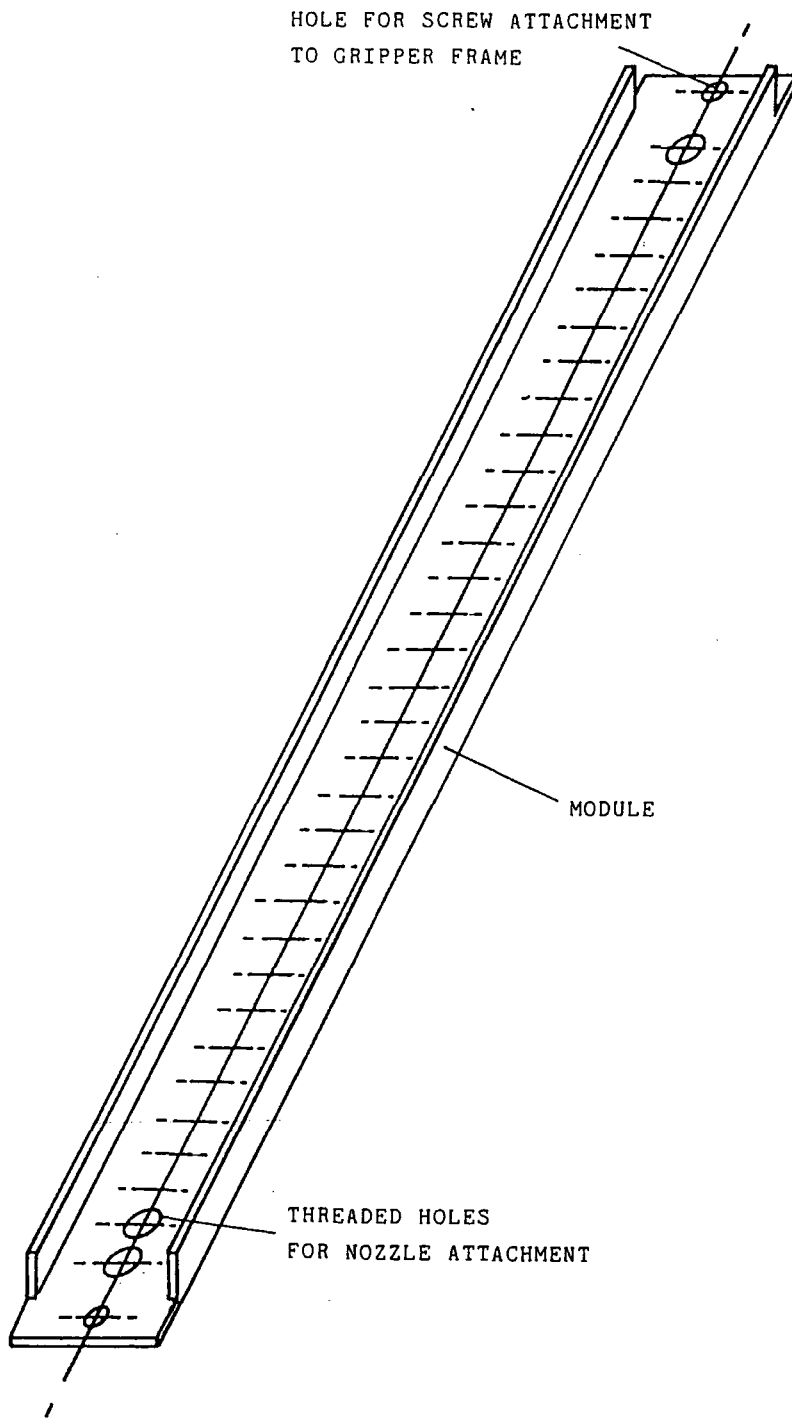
Modular Vacuum Nozzle Carrier Bar
